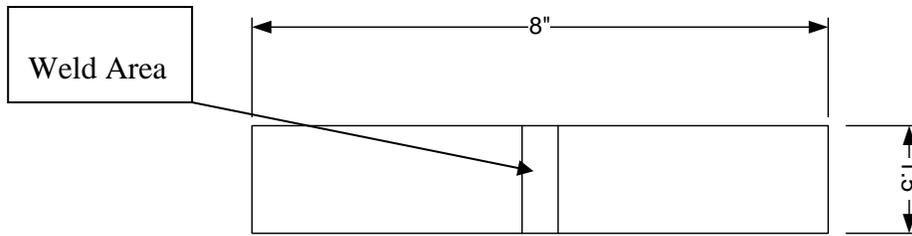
Face Bend Sample of ERNiCuRu Weld
